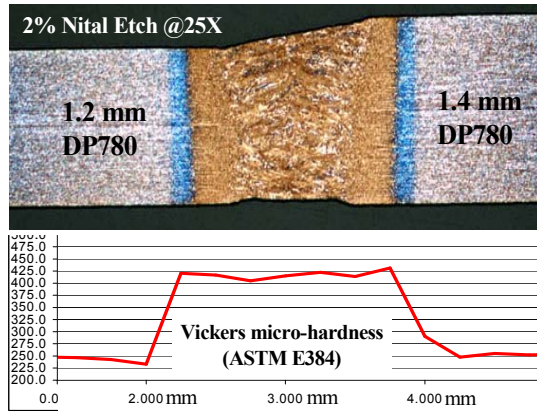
Laser weld's HAZ and micro-hardness.
